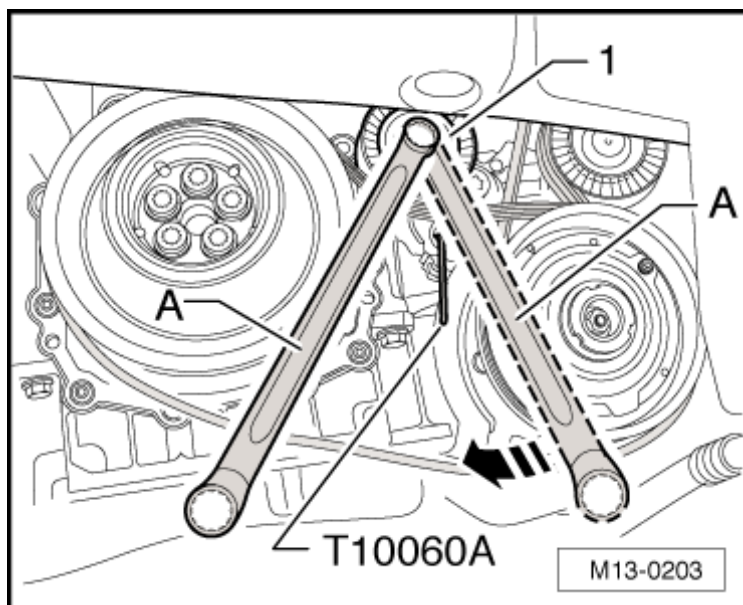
Identifying Rotation Of Tensioner Secured In Position With Locking Pin T10060A
